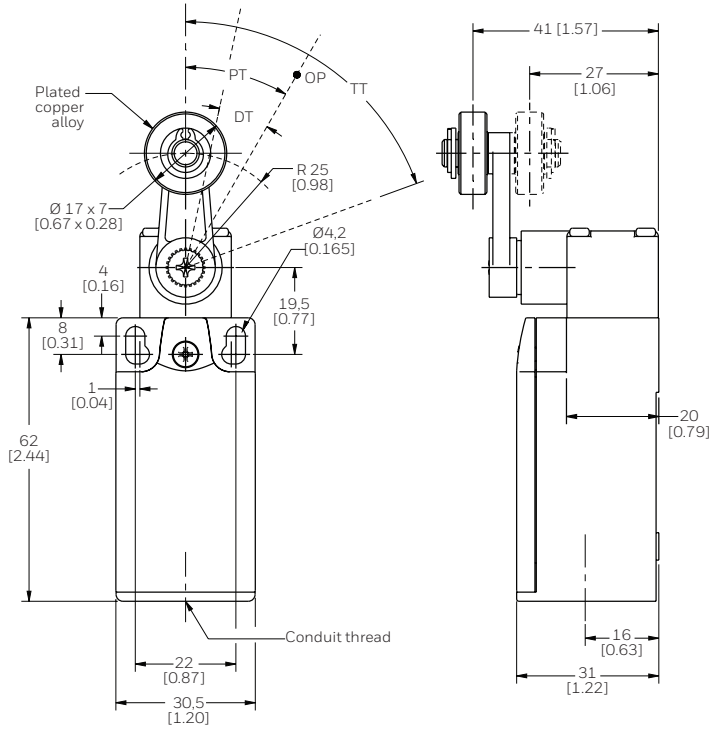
GLL Side Rotary (A3B) with Fixed Lever Dimensions
